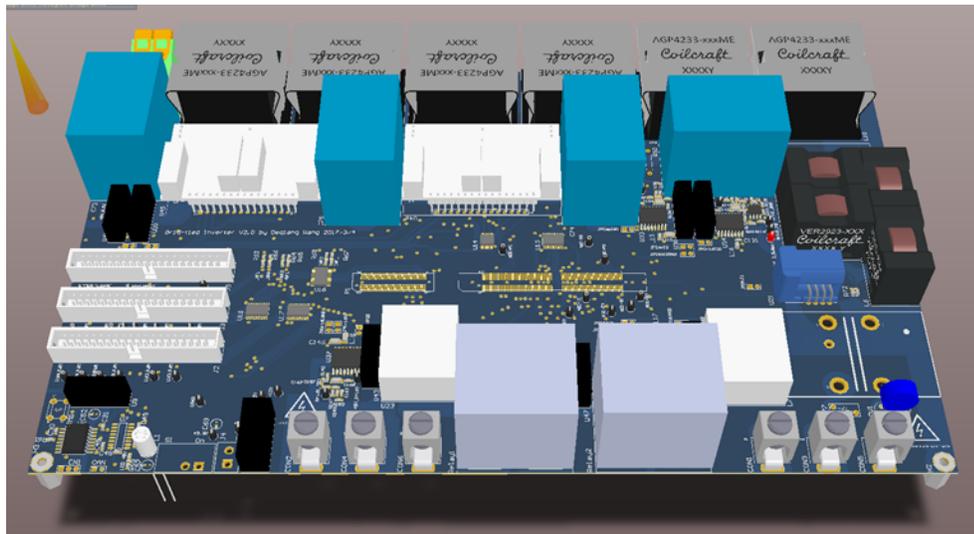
3D PCB model of single-phase inverter with controller interface.
